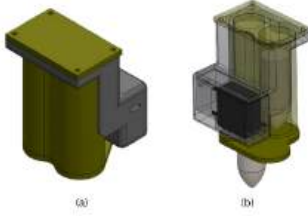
(a) Outside view, (b) Inside view of marker dropper
